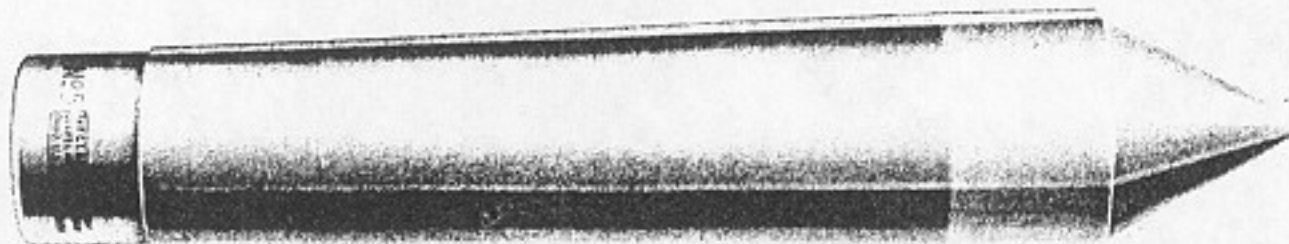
The dead center is hardened. The 60° angle point must be ground on this center. The live center is soft, and therefore can be turned in the lathe. (Courtesy Cleveland Twist Drill Co.)
